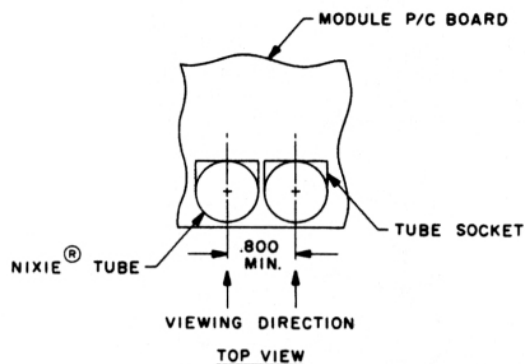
SERIES MOUNTING ON DRIVER MODULE BOARD
